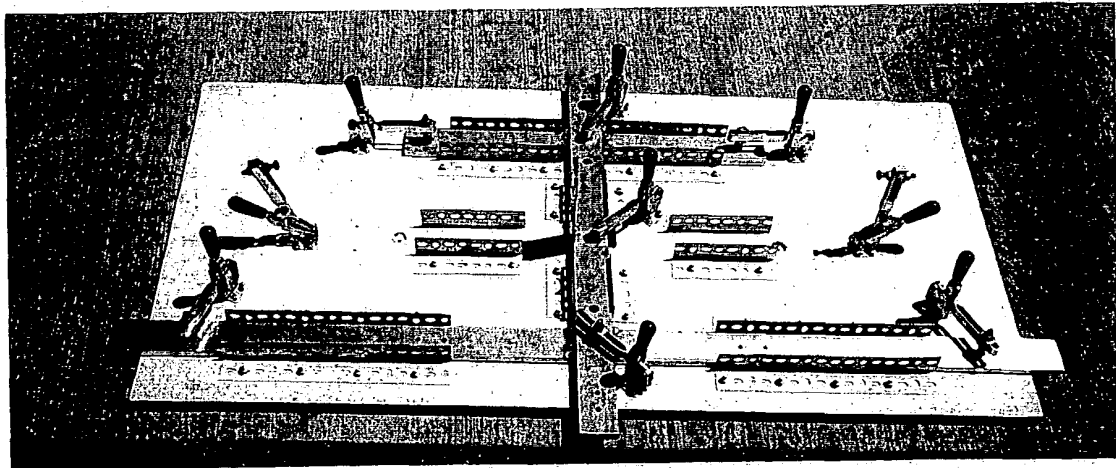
REAR UNIT TO OUT SIDE RAIL
